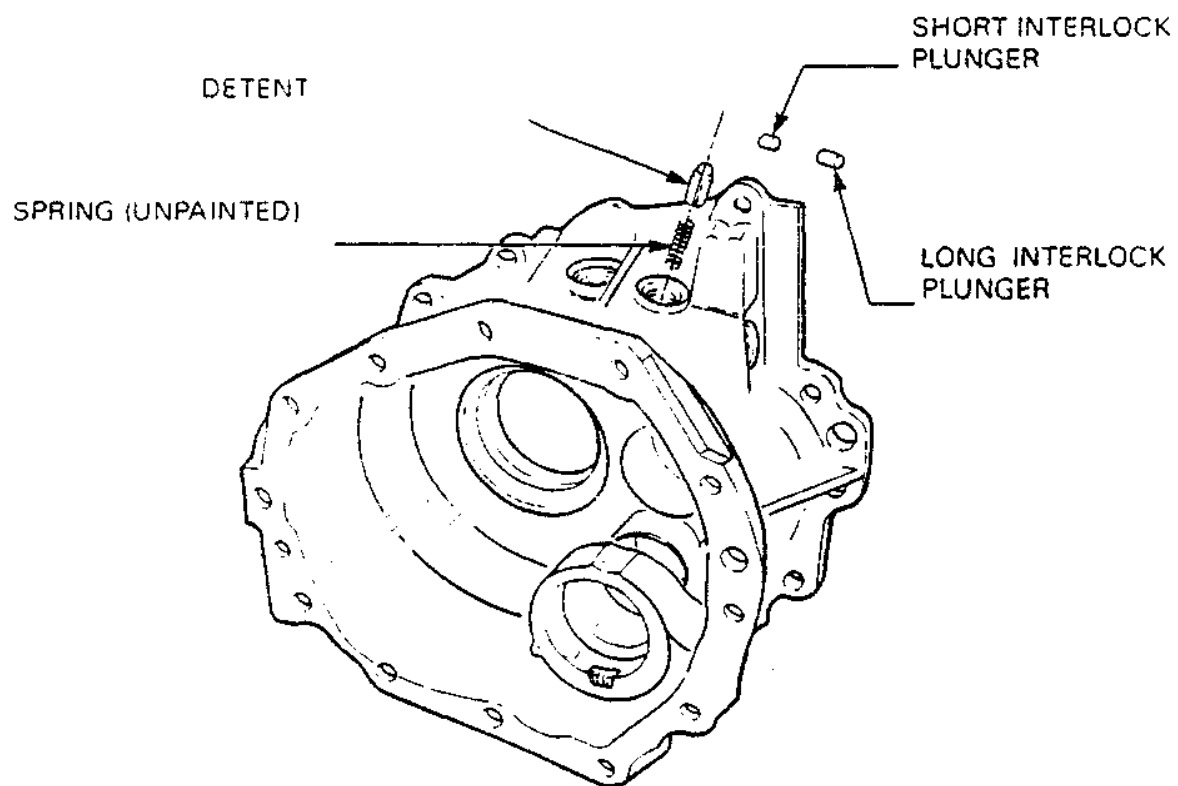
Interlocking Plungers, Gear Detent Plug and Spring
